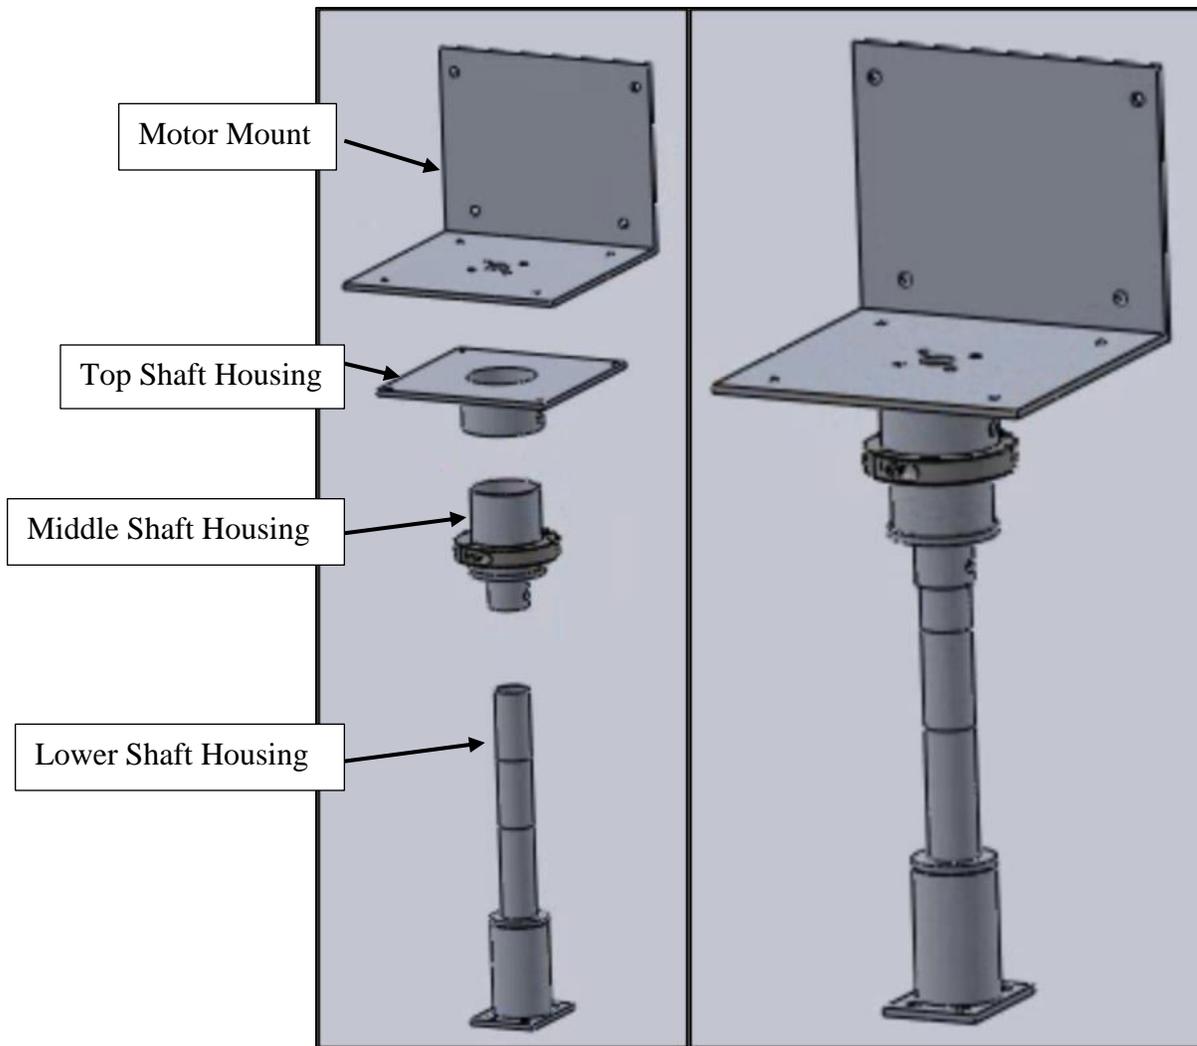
Shaft Housing Assembly. The image on the left is the exploded view, while on the right is the unexploded view.
